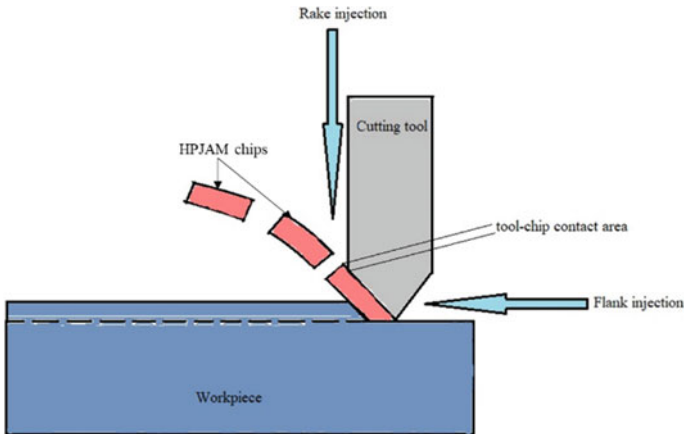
Flank and rake injection of cooling lubricant in HPJAM
